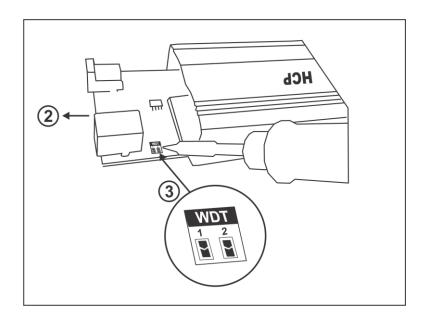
Soldering WDT jumper resistors for Watchdog mode selection
